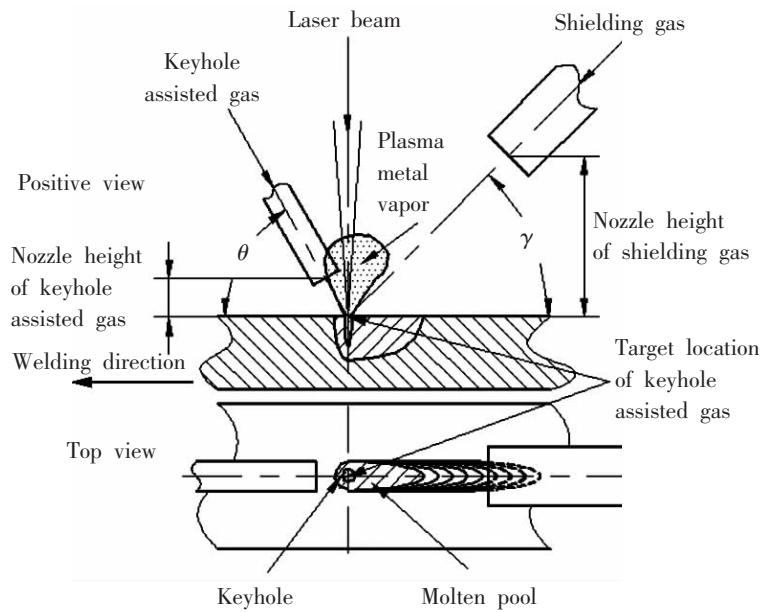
Sketch of gas-jet-assisted keyhole laser welding
